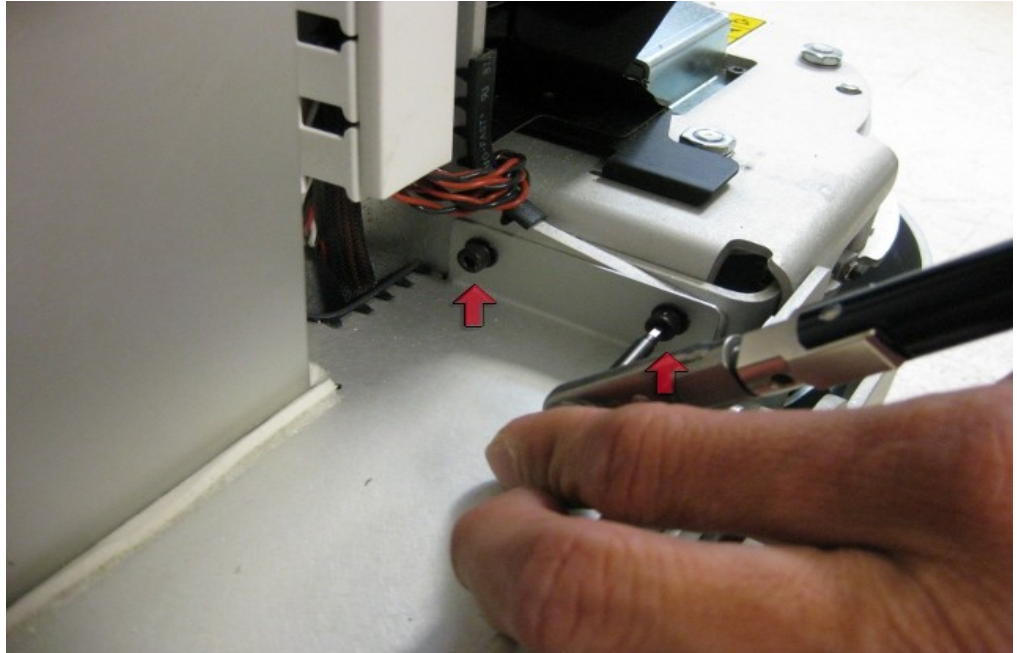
Remove runstop bracket. Approximate locations of screws are marked.
